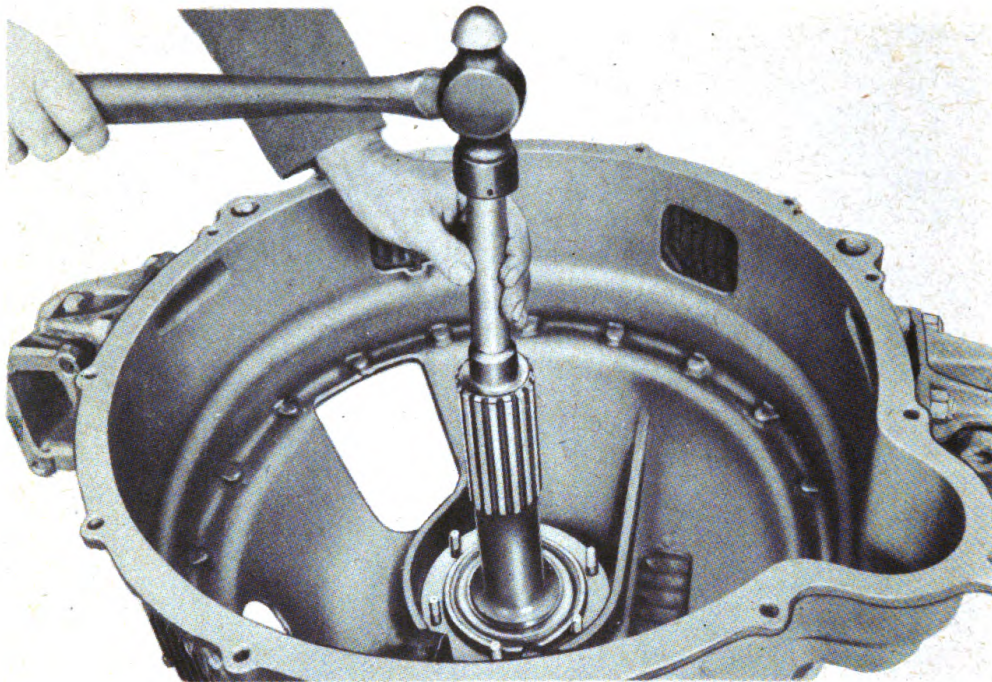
Removing Clutch Alining Tool (41-T-3083-75)
